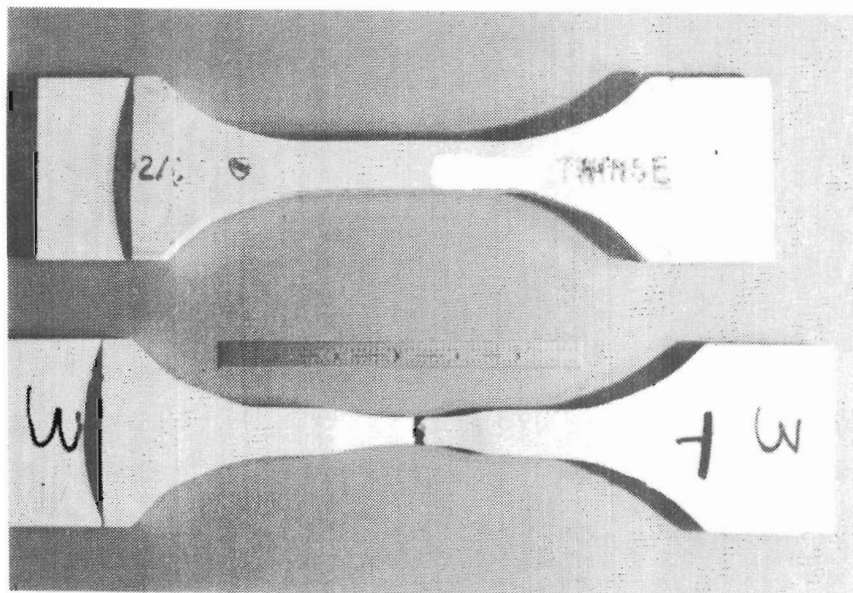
Dumbbell tensile specimens were machined from the well casing walls.
